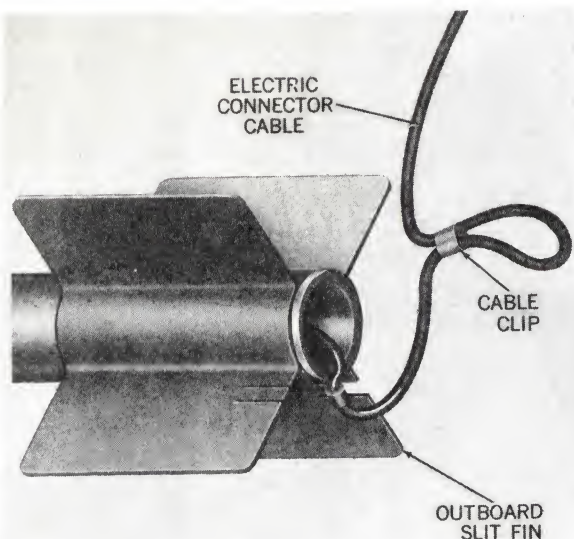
Electrical Connector Cable Snubbed to Fin of 2.25-Inch Rocket.
